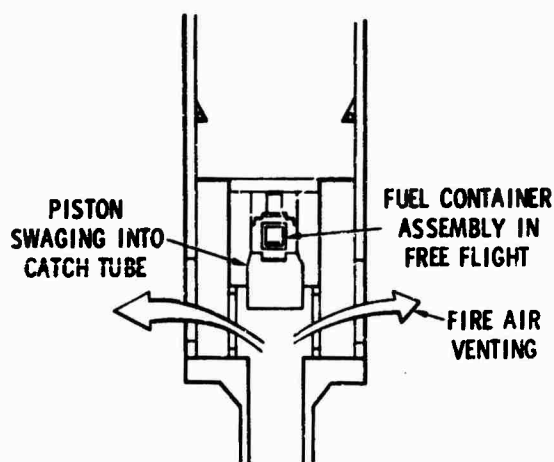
Piston Impact and Release of Fuel Container Assembly
